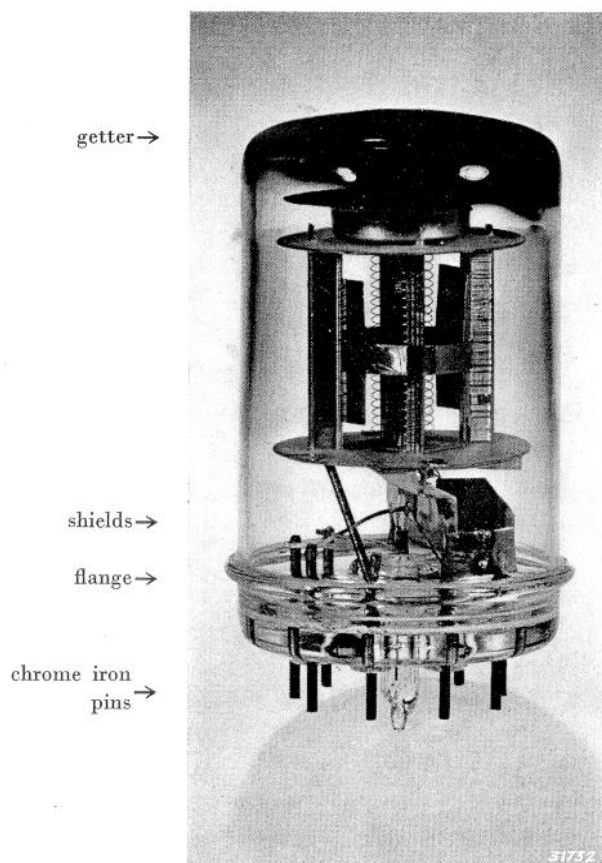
Photograph of the exhausted and sealed-off valve. Directly above the flange along which the base and bulb are fused together may be seen the two mutually perpendicular shields which separate grid and anode leads from each other, making it possible to keep the grid-anode capacity C_{ag} low. The length from the sealing-off point of the exhaust tube to the base is short. The getter is deposited at the black spot in the upper part of the bulb.
